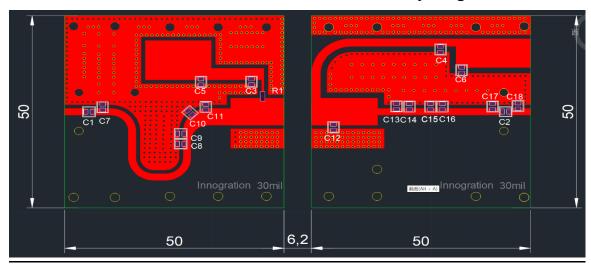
Test Circuit Component Layout (425-475MHz) RO4350B 30mils
